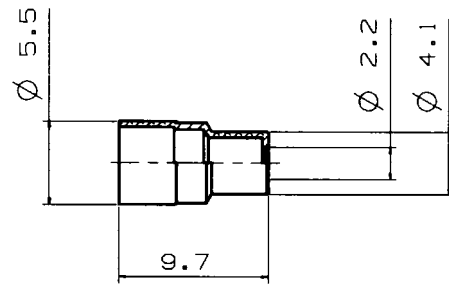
#2-2 Crimping ring (for $\varnothing 2.0$ mm cord)
